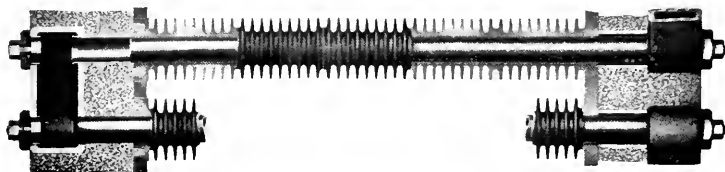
Sectional view of marine type economizer. Straight steel tubes with iron, gill ring castings shrunk on and having their ends connected by forged steel headers. This gill ring construction presents six times more heat absorbing surface per linear foot than would the bare steel tubing.
